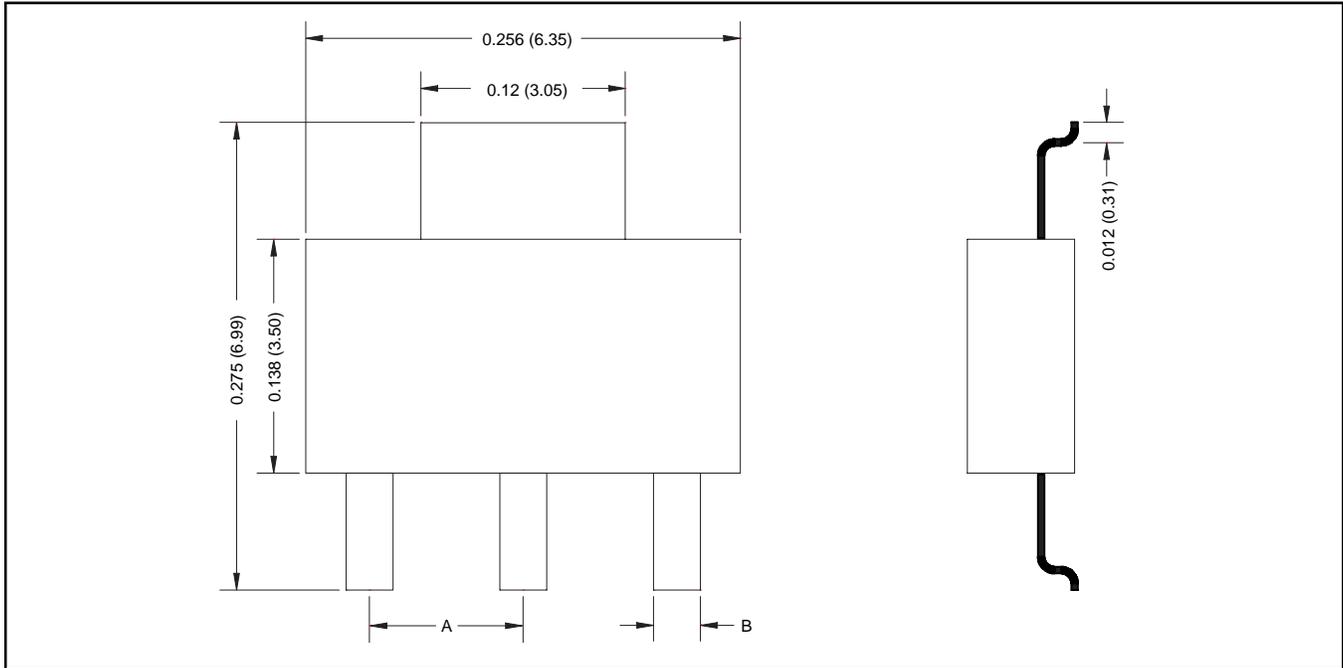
SOT223 Package Dimensions—Inches (mm).
